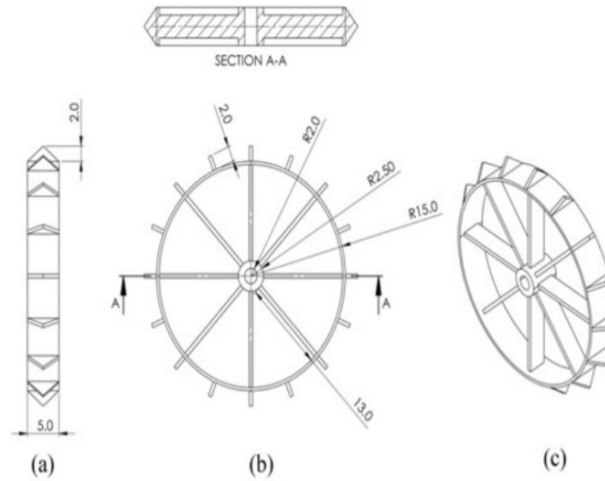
a) side view b) front view c) Isometric view of ground wheel
